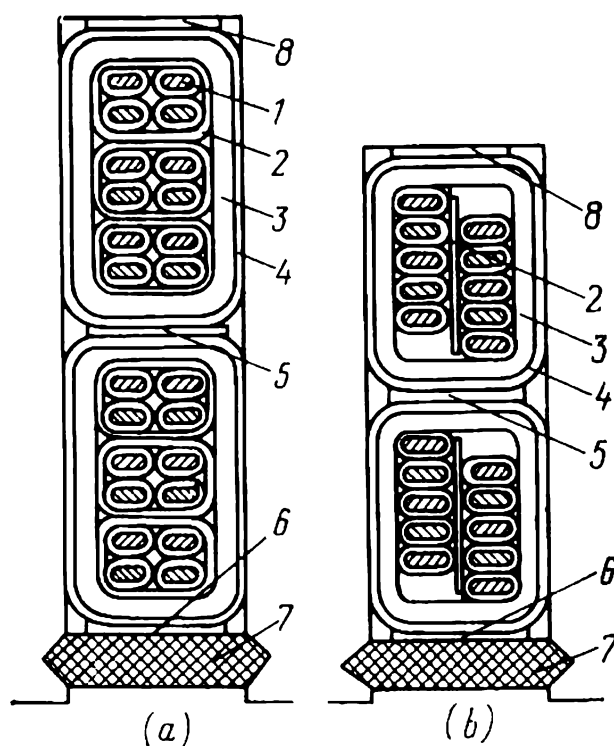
Sectional views of slots with (a) two-layer formed-coil winding and (b) two-layer bar-type winding
